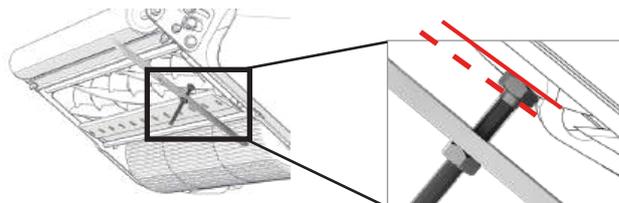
C - Position the setting bar and observe distance between the top of the shear blade and bottom on the bolt head. In this example, the underside of the bolt head is below (dashed line) the shear blade (solid line), indicating the machine cut height is currently too high and therefore needs lowering.
